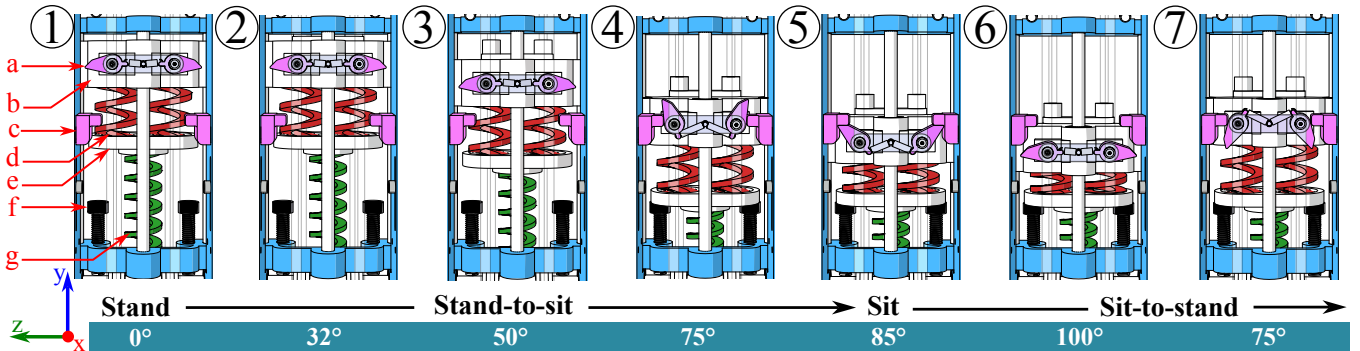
Front view of the double stiffness and knee extension locking mechanisms during the stand-to-sit (steps 1-5) and sit-to-stand (steps 5-7) transitions. The main parts of the mechanisms are: (a) knee extension locking cam, (b) double stiffness carriage, (c) L-shaped locking support, (d) high stiffness sitting spring, (e) intermediate spring coupling plate, (f) adjustable linear motion stopper, and (g) swing spring (extension torque).
